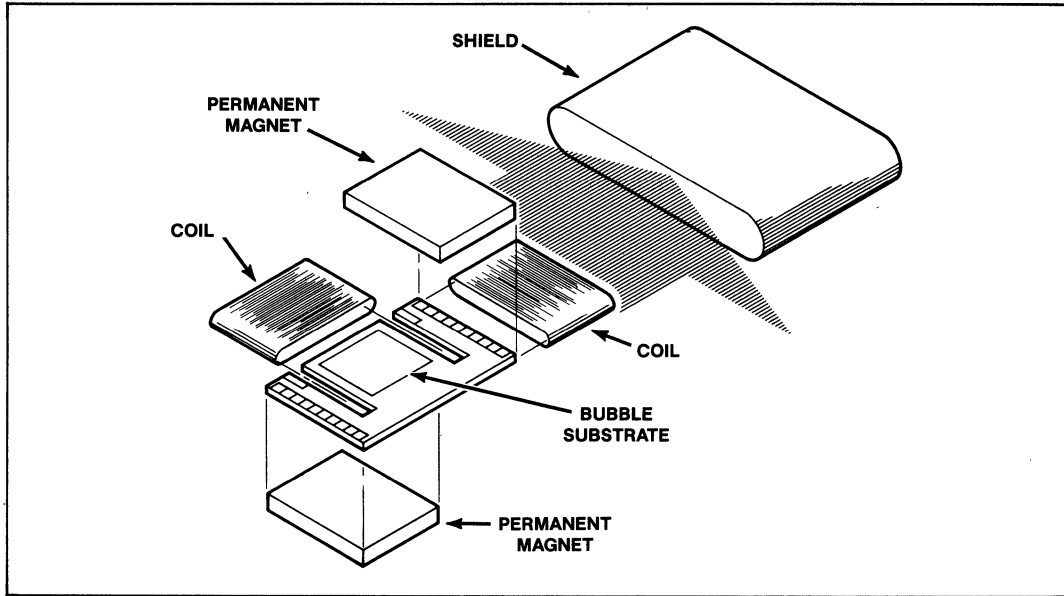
Magnetic Bubble Unit Assembly—Exploded View
